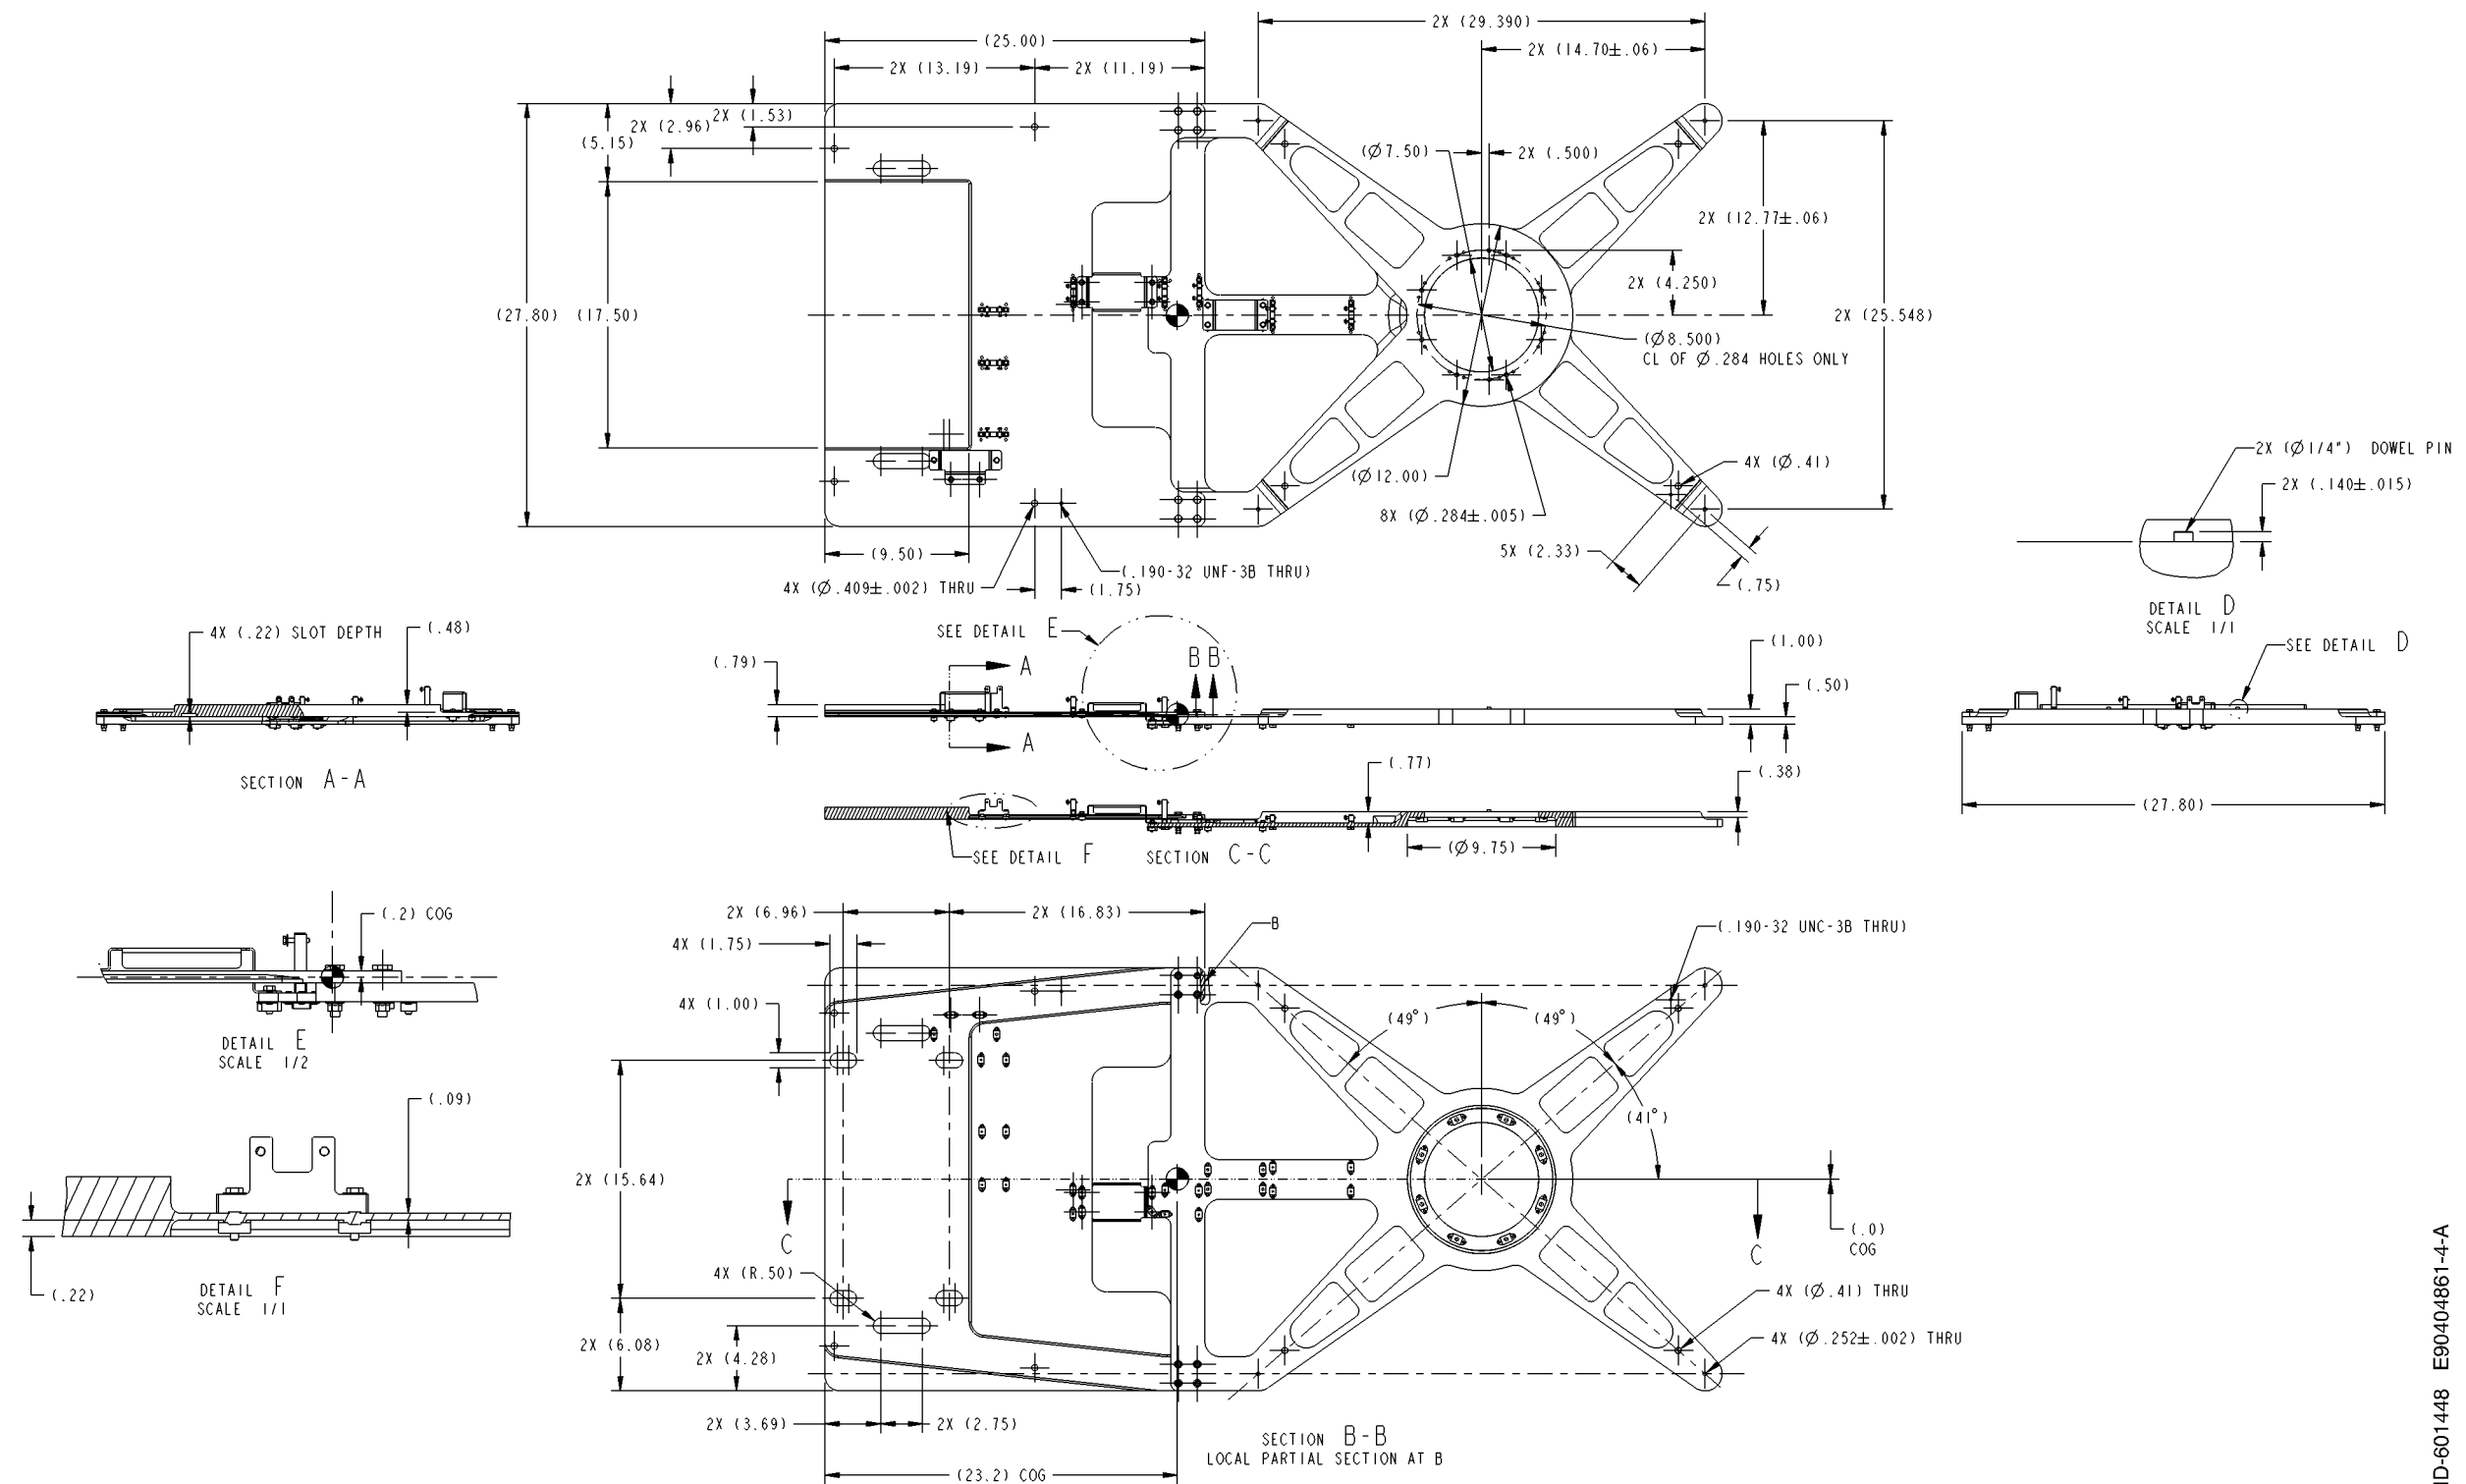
(Sheet 3 of 4) LAIM Outline and Installation Drawing (90404861, REV A)
